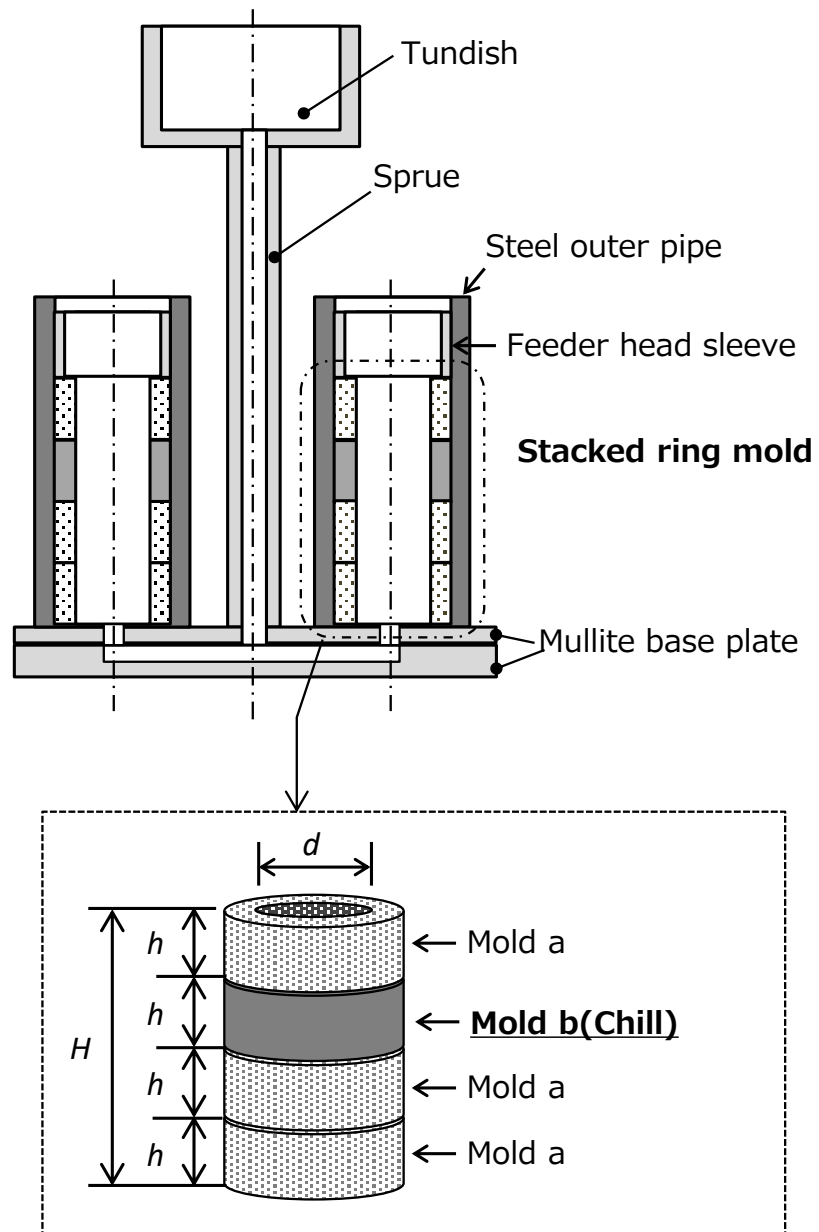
1 Schematic drawing of bottom pouring method and experimental mold
